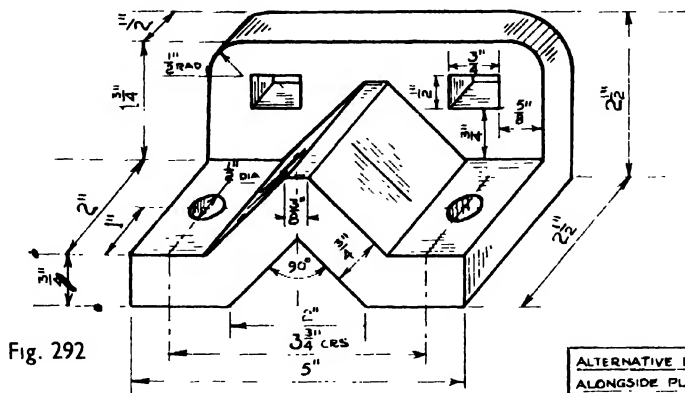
shows the dimensioned sketch of a vee shaped casting.
